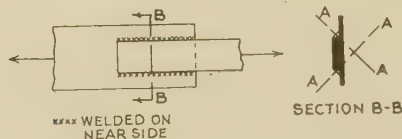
Lap joint loaded parallel to lines of welding.
